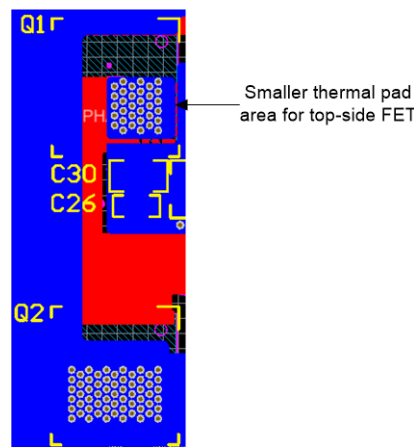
Bottom Layer Pad Area in FR-4 PCB
